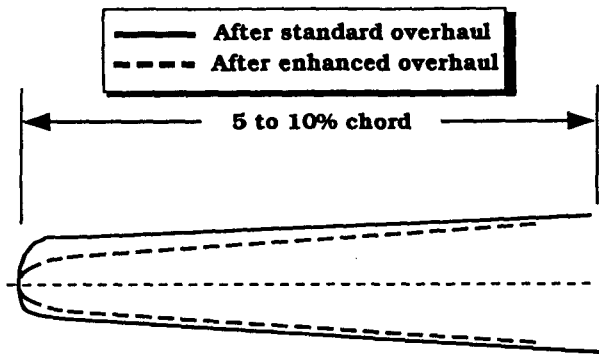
Blade leading edge shape before and after enhanced refurbishment
